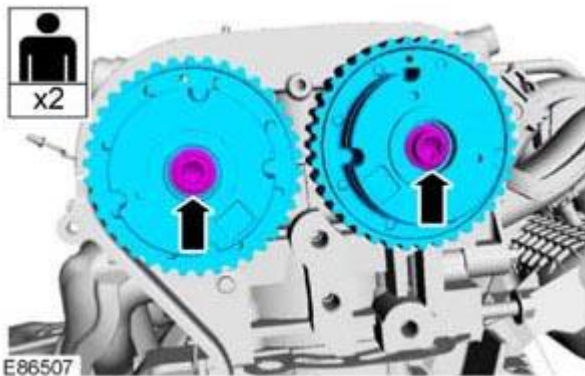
Locating Bolts And Camshaft Phaser And Sprockets
